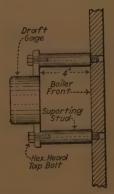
Draft-pressure gage mounted on boiler front on study
